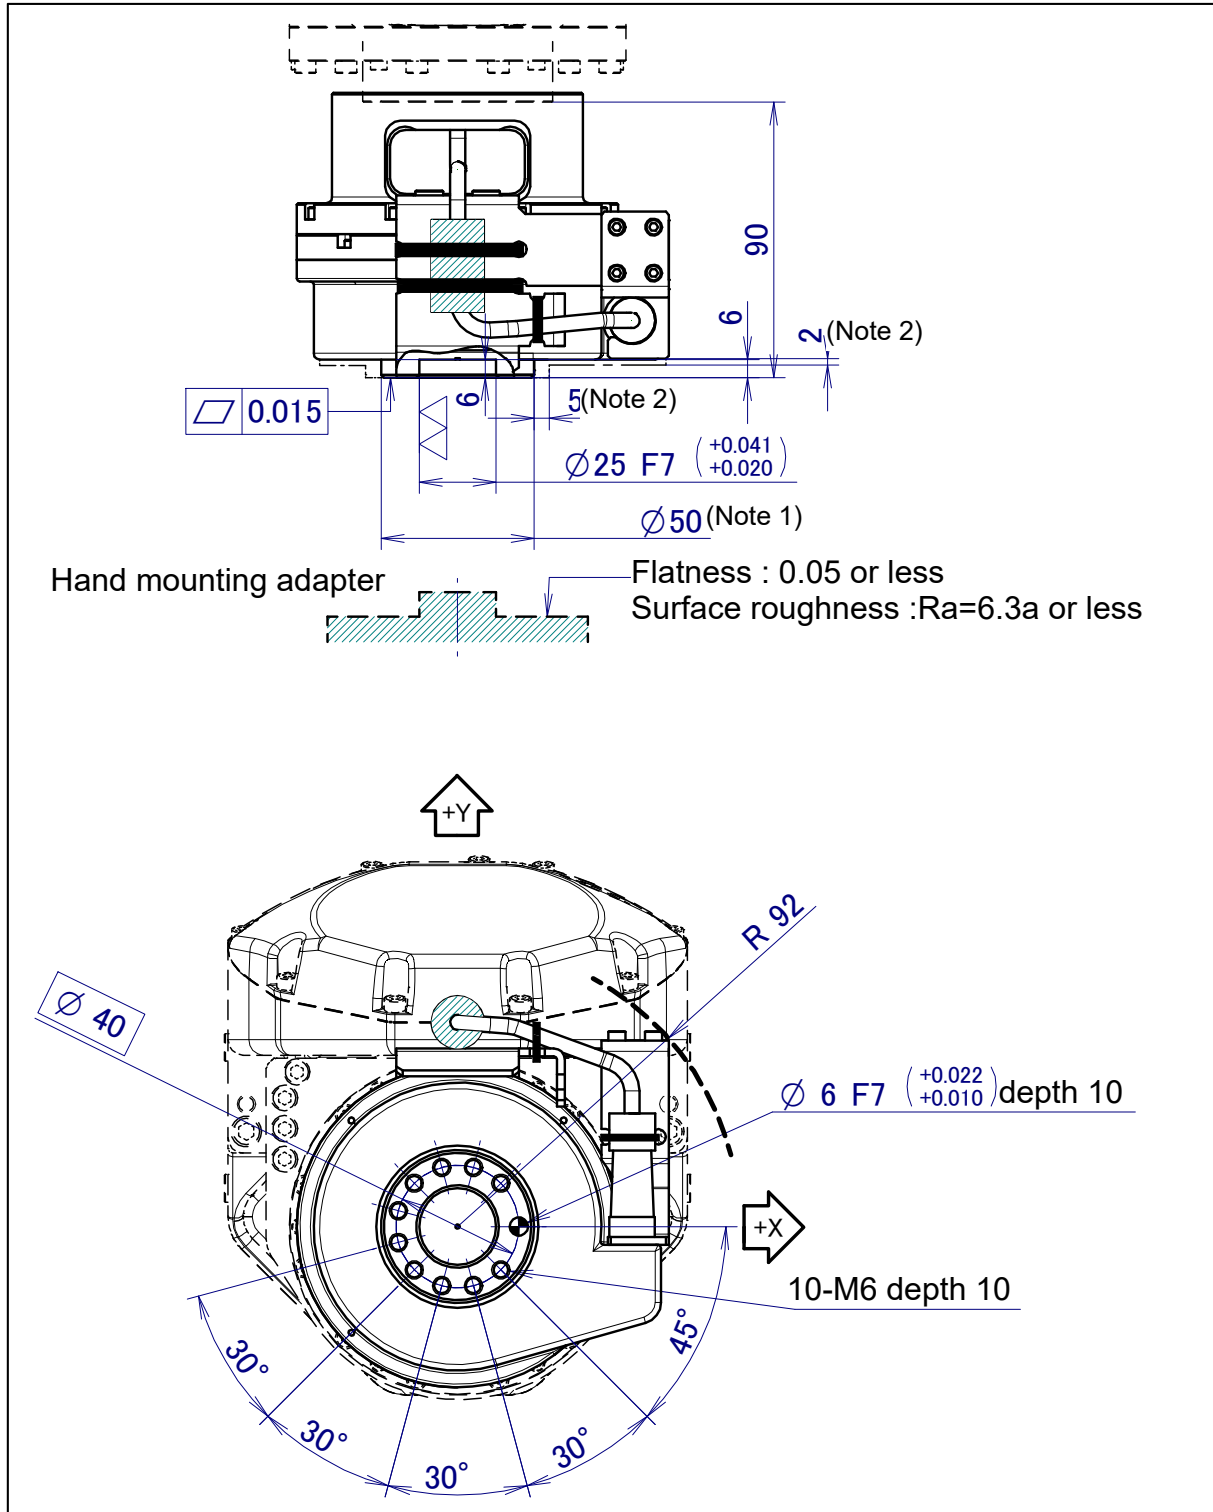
(b) Wrist section end effector mounting surface (FS-40iA)
